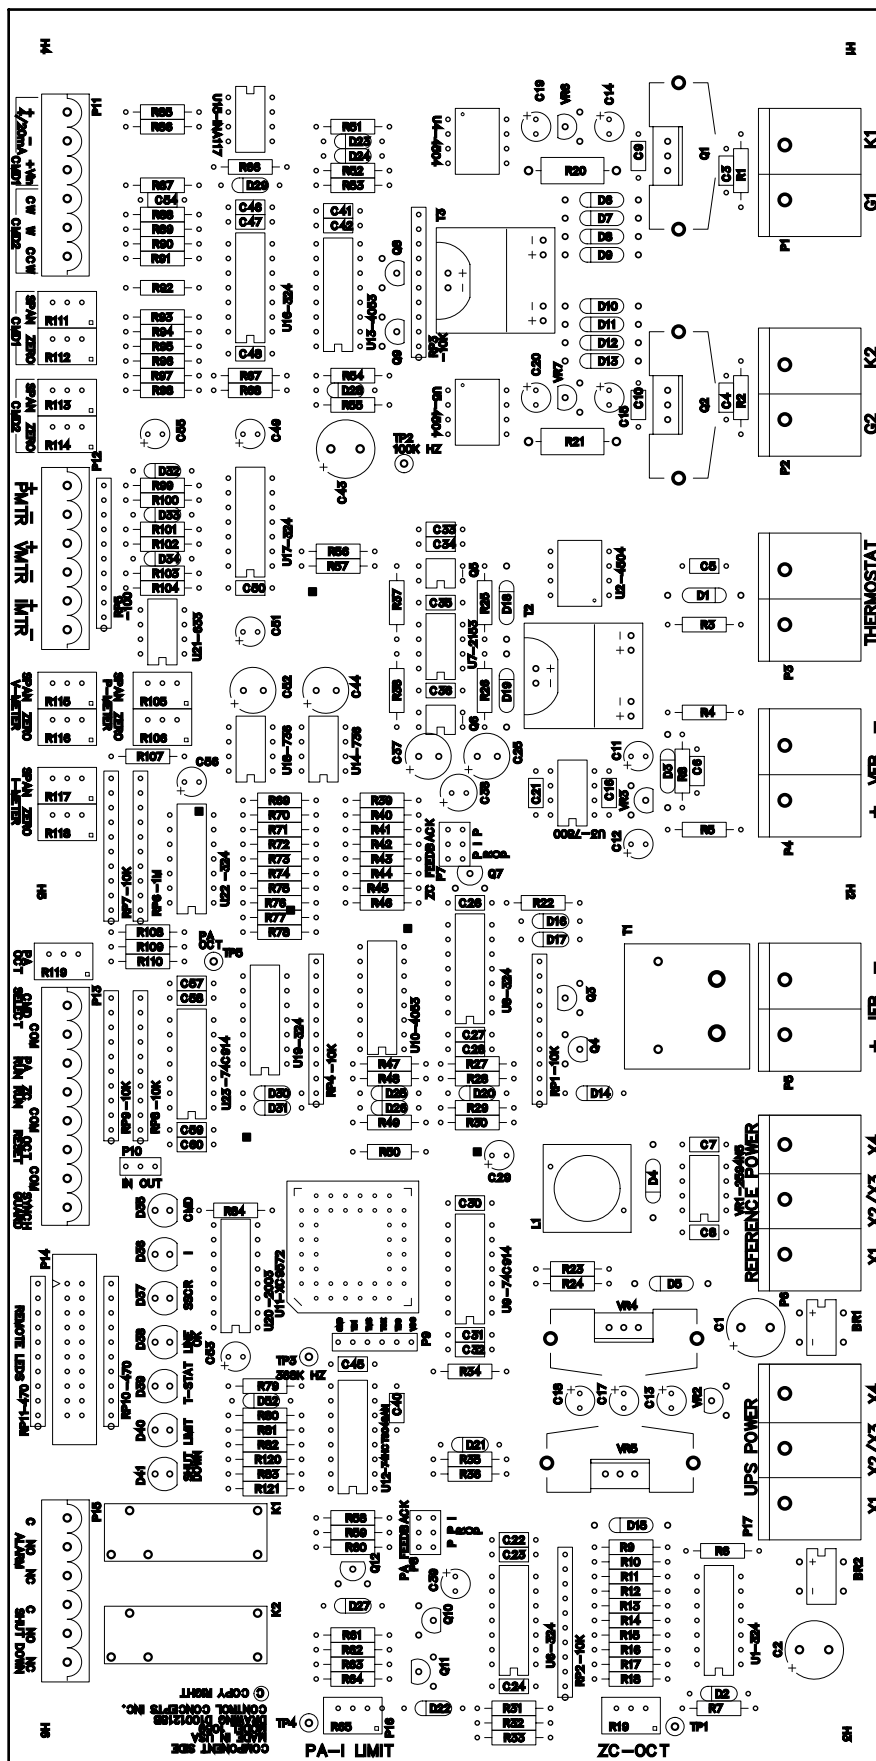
Model 1095-2000 Remote Firing Circuit Board.
